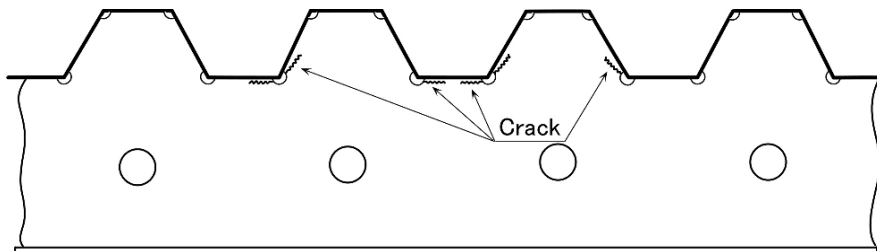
Example of damage occurred in horizontal girder of corrugated bulkhead
